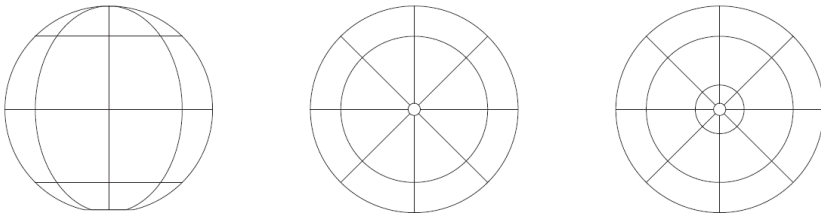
Acrylic coating: Side view, Top view, Bottom view
